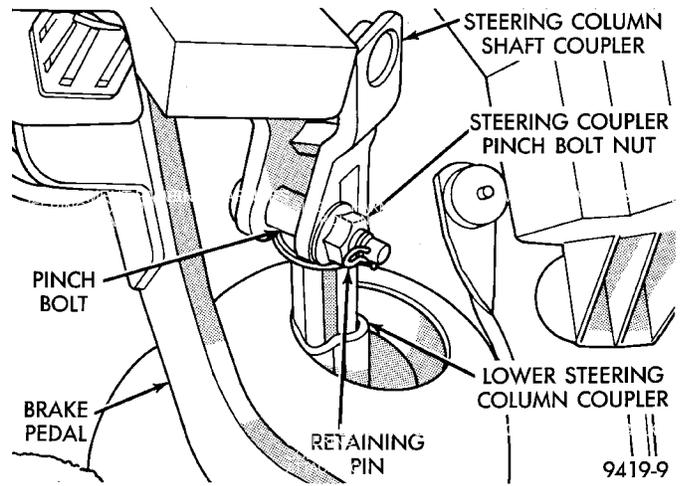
Upper To Lower Steering Column Coupler Disassembly
